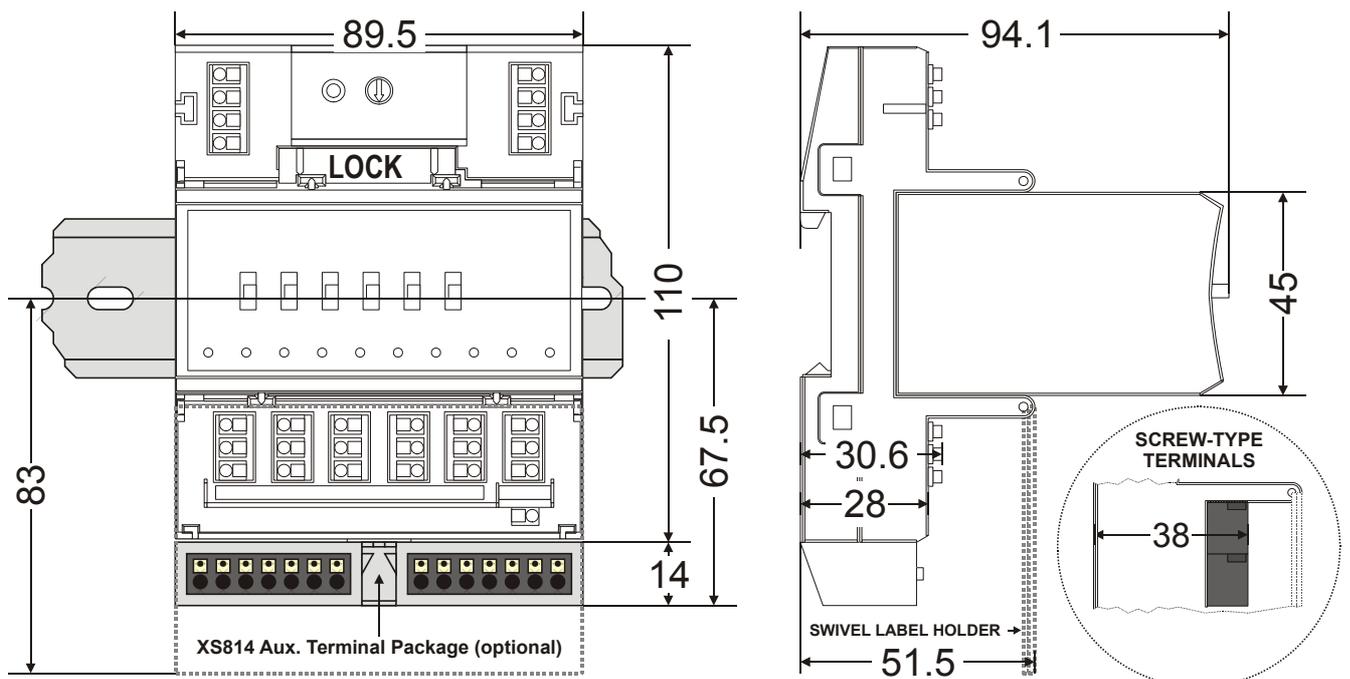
LION I/O Modules (example shows Manual Overrides), incl. Terminal Socket, outside dimensions (in mm)
